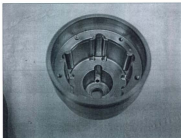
Completed part with wiring space slots, and a test fit of drive rods.
